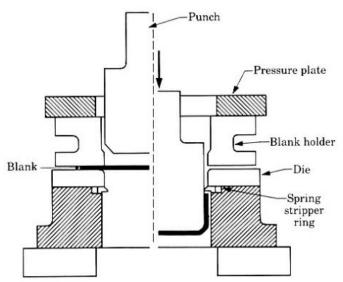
Deep drawing of a cup-shaped part: (*Left*) start of the operation before punch contacts blank, and (*Right*) end of stroke
